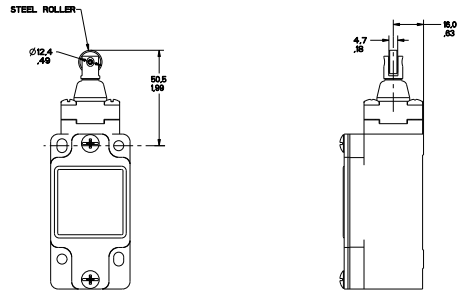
TOP ROLLER PLUNGER HEAD
